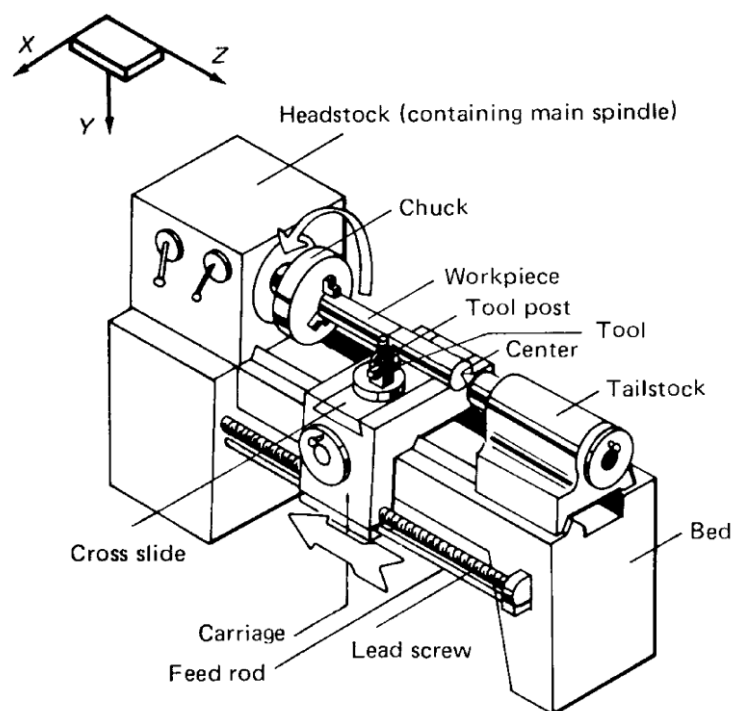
Lathe schematics. [Boothroyd & Knight, 1989]
